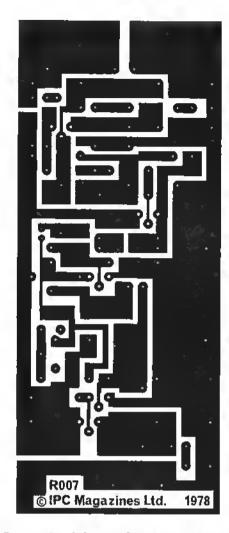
Copper track layout for Board 1. Ready drilled boards for this instrument are available from Reader's PCB Services (See page 68)
